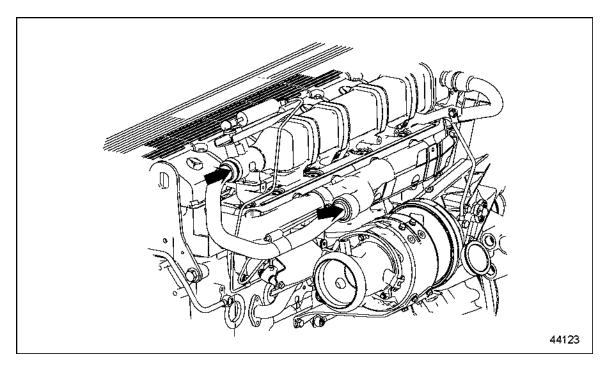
Exhaust Manifold Gas Inlet Pipe Removal
